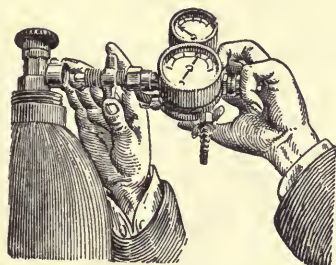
Fixing the reducing valve on the oxygen cylinder.
